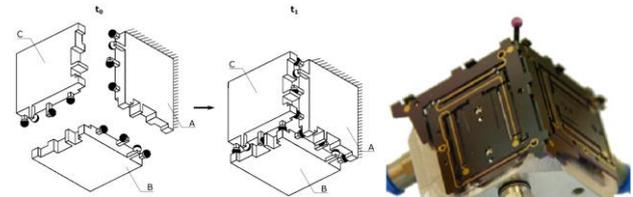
Left: kinematic mount configuration C6 in unassembled and assembled states. Right: sugar-cube size delta robot with kinematic mount configuration C6.
